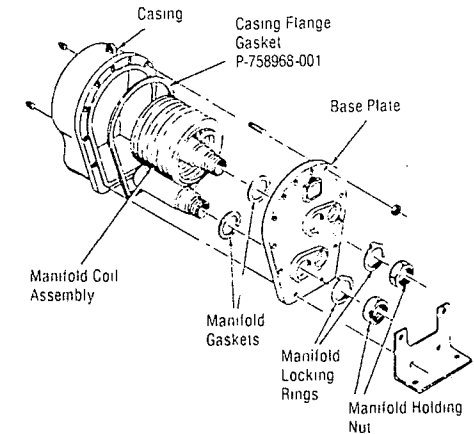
BOOSTER ASSEMBLY, STEAM HEATED.
